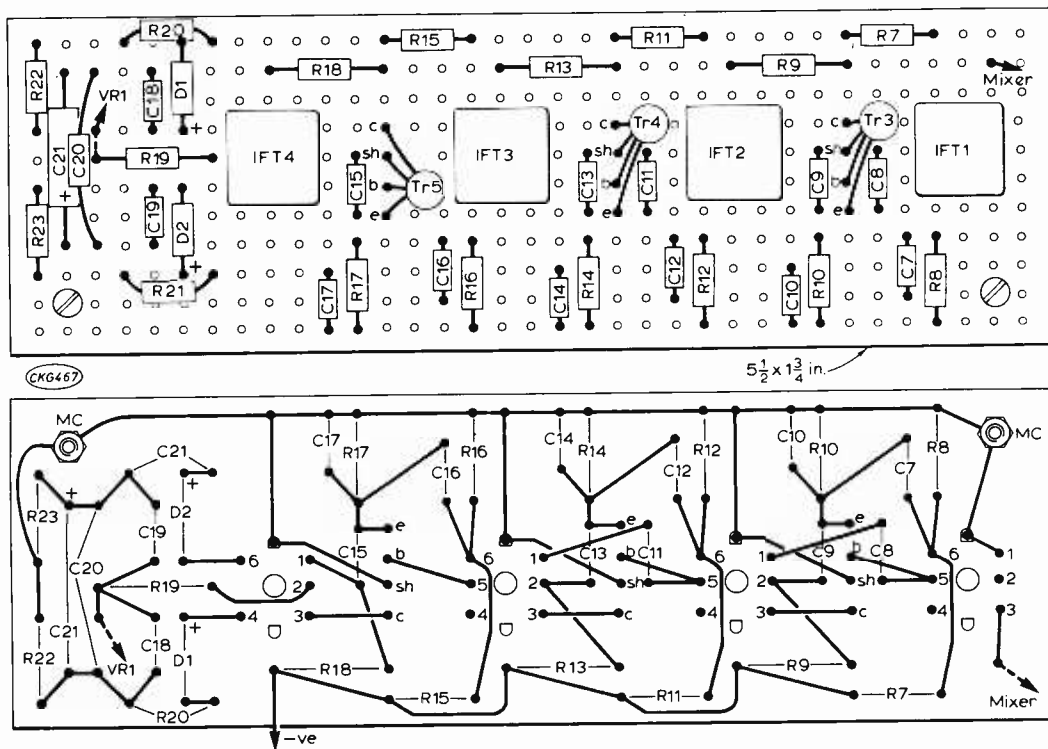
The two sides of the IF amplifier board, shown actual size, illustrating component layout and wiring.
